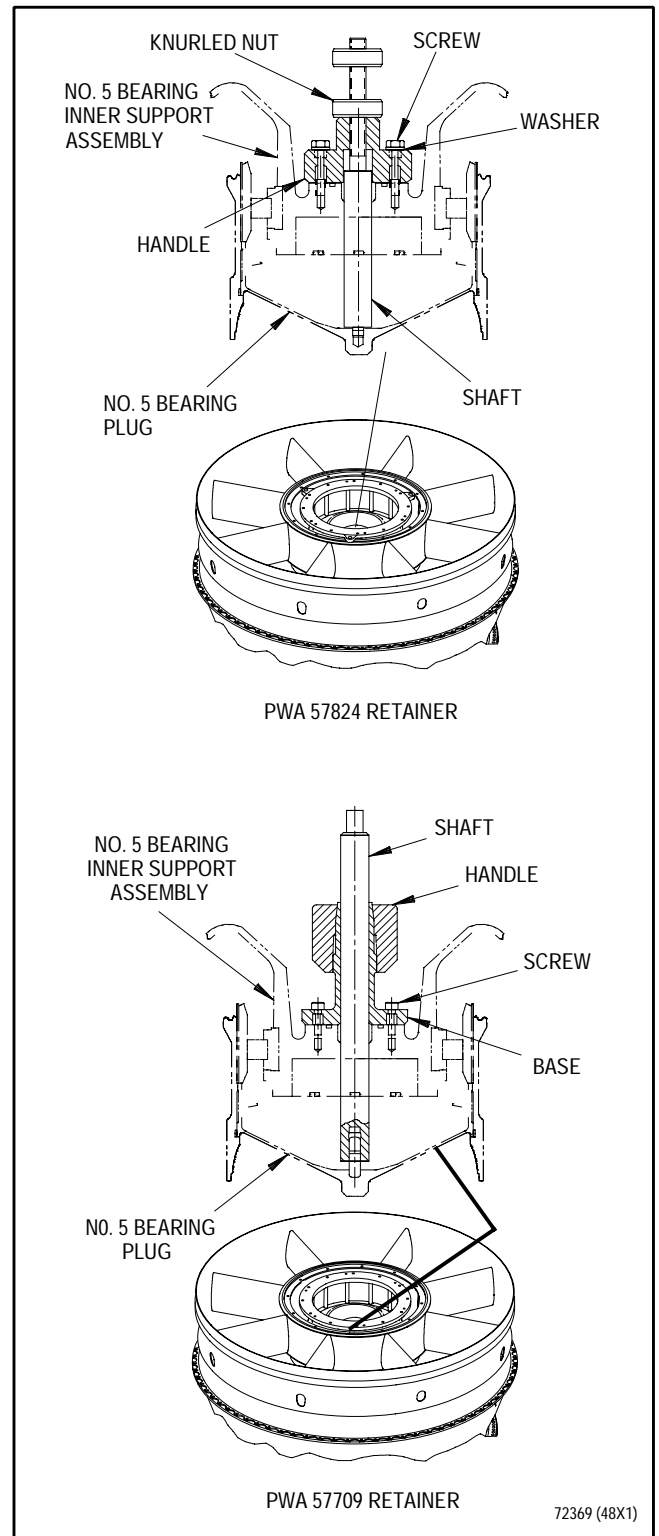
No. 5 Bearing Inner Race and Rollers - Installation (Sheet 5 of 5)
